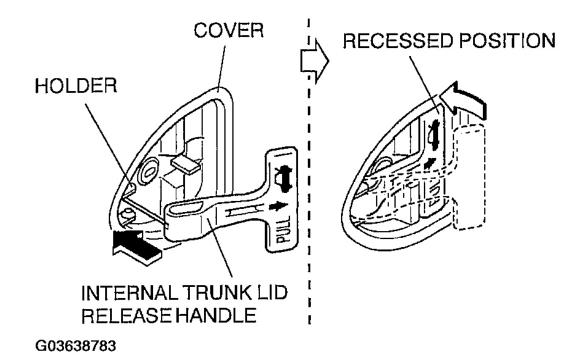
Installing Internal Trunk Lid Release Handle Courtesy of MAZDA MOTORS CORP.
